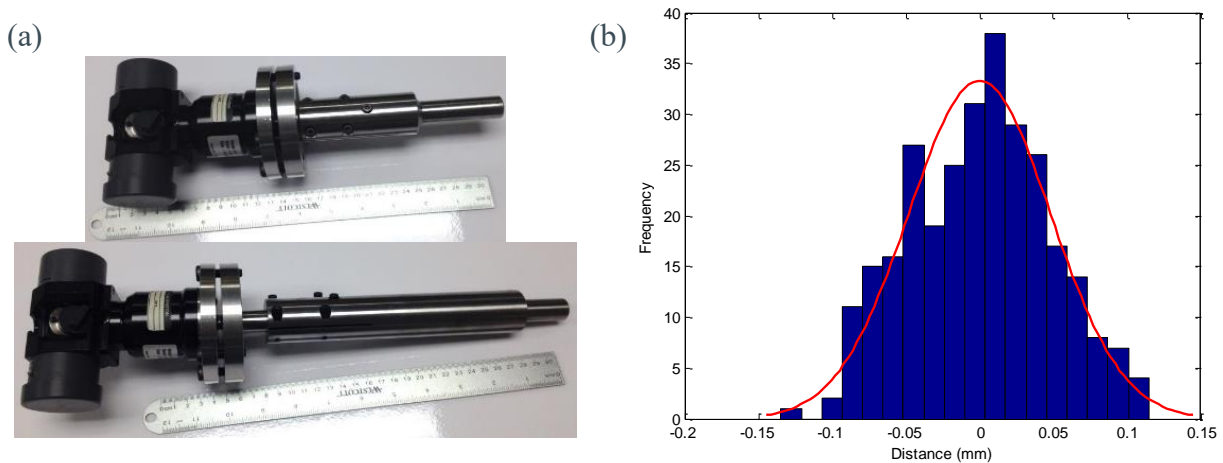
(a). Active Target machine tool spindle mounts; (b) Distance between short tool and long tool measurements.
